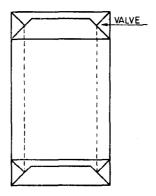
Valved-Pasted-Gusseted-Rectangular Ends Sack
